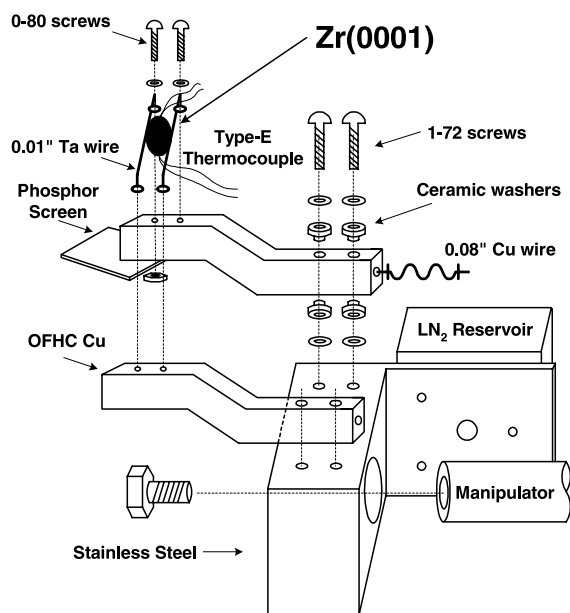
Schematic diagram of custom designed sample holder assembly.
